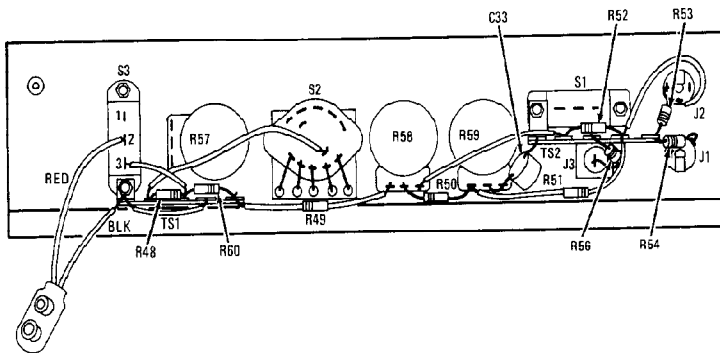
PARTS MOUNTED AND WIRED entirely on the front panel.
